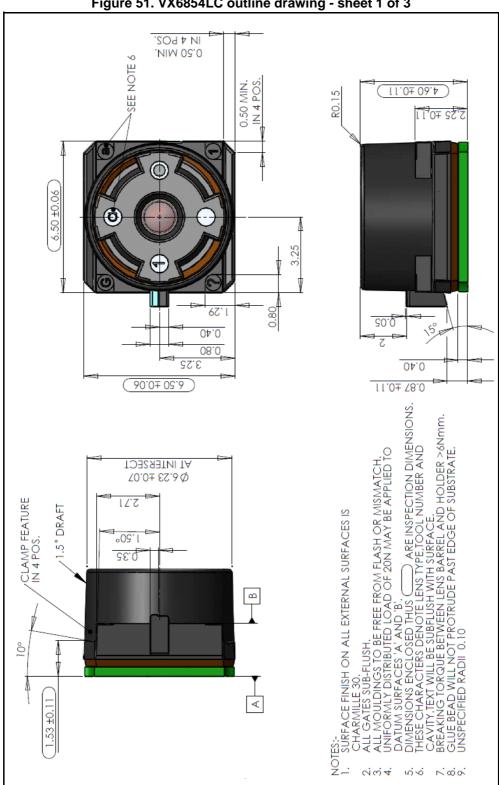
VX6854LC outline drawing - sheet 1 of 3
